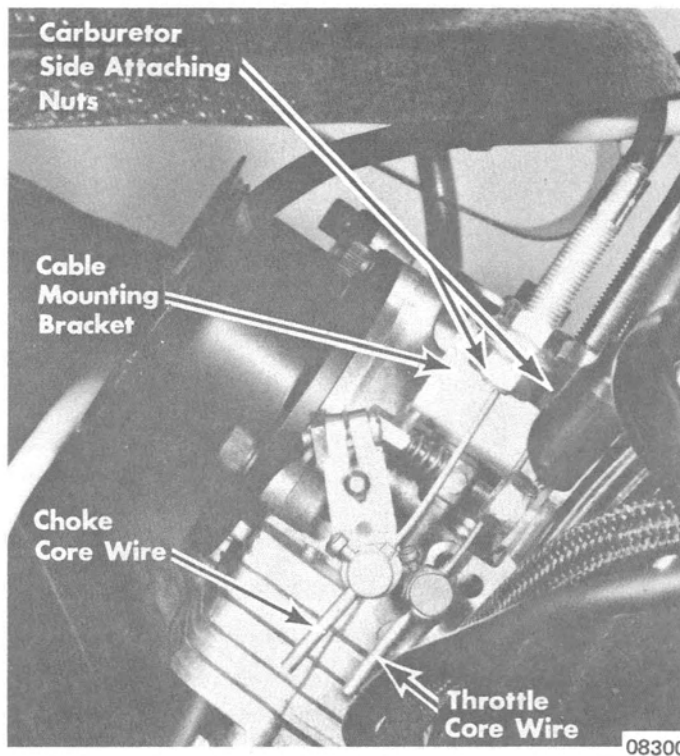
A. Carburetor - Mark II (Chassis Serial No. 3787640 and Above)
